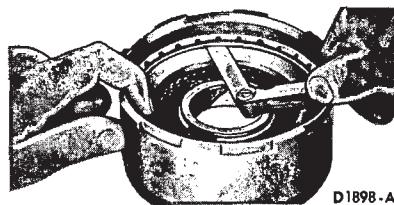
Checking Reverse-High Clutch Snap Ring Clearance
